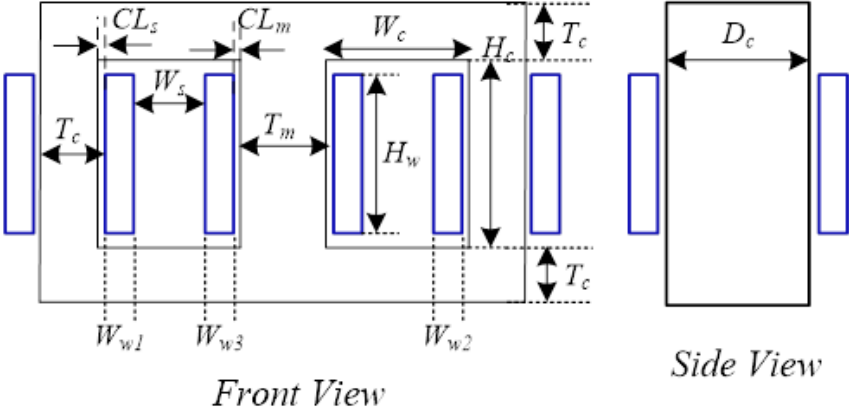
Dimensional View for Three Limb Three Winding Transformer.
